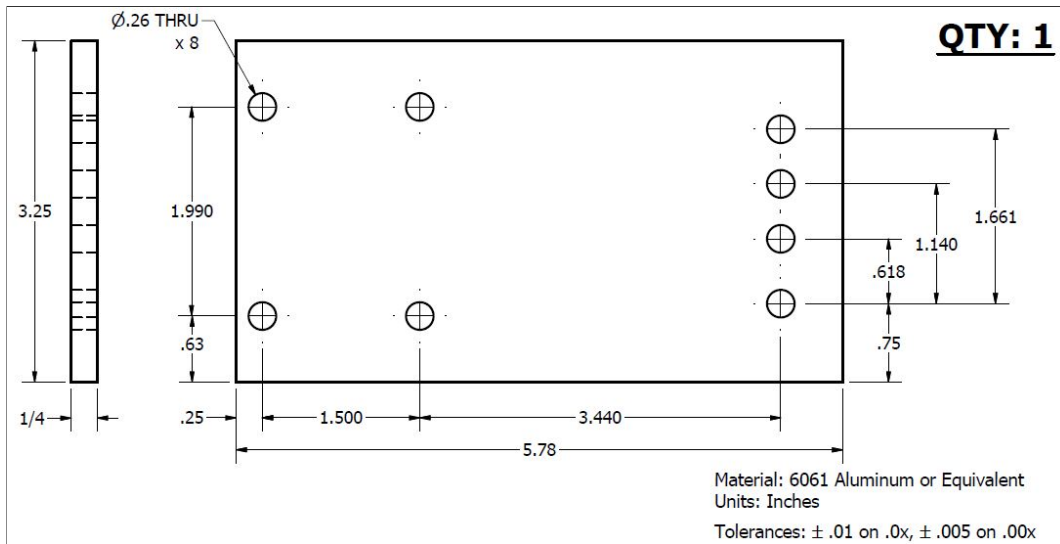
Right camera horizontal mounting plate mechanical drawing.
